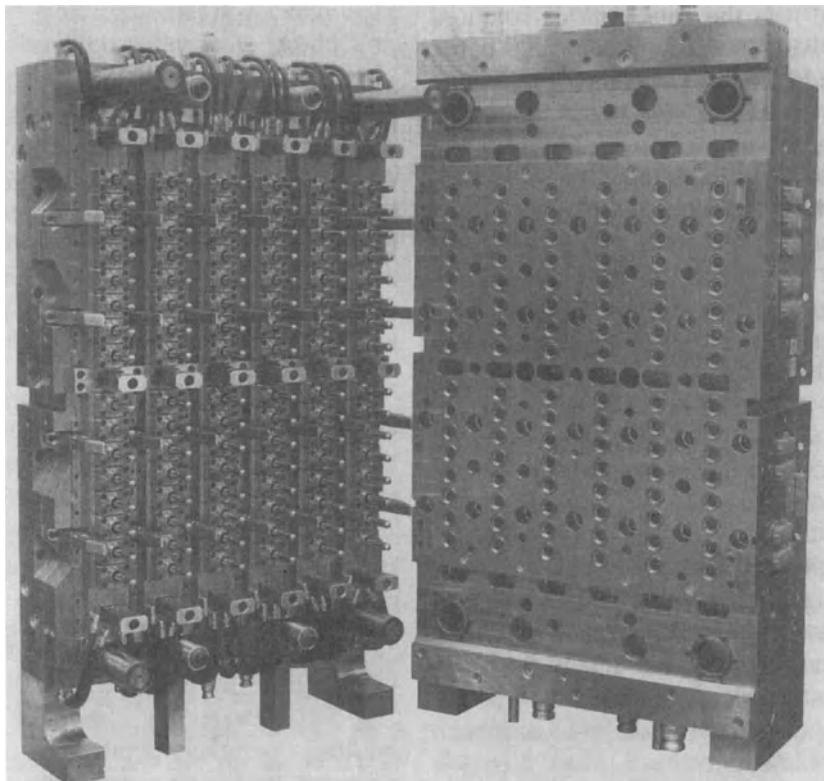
This 96-cavity mold from Husky produces preforms for stretched injection blow molding containers (Chap. 15).
